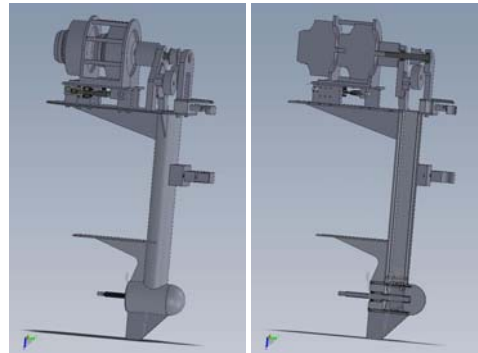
CAD renderings: final design (left); Cut-away of final design (right)
